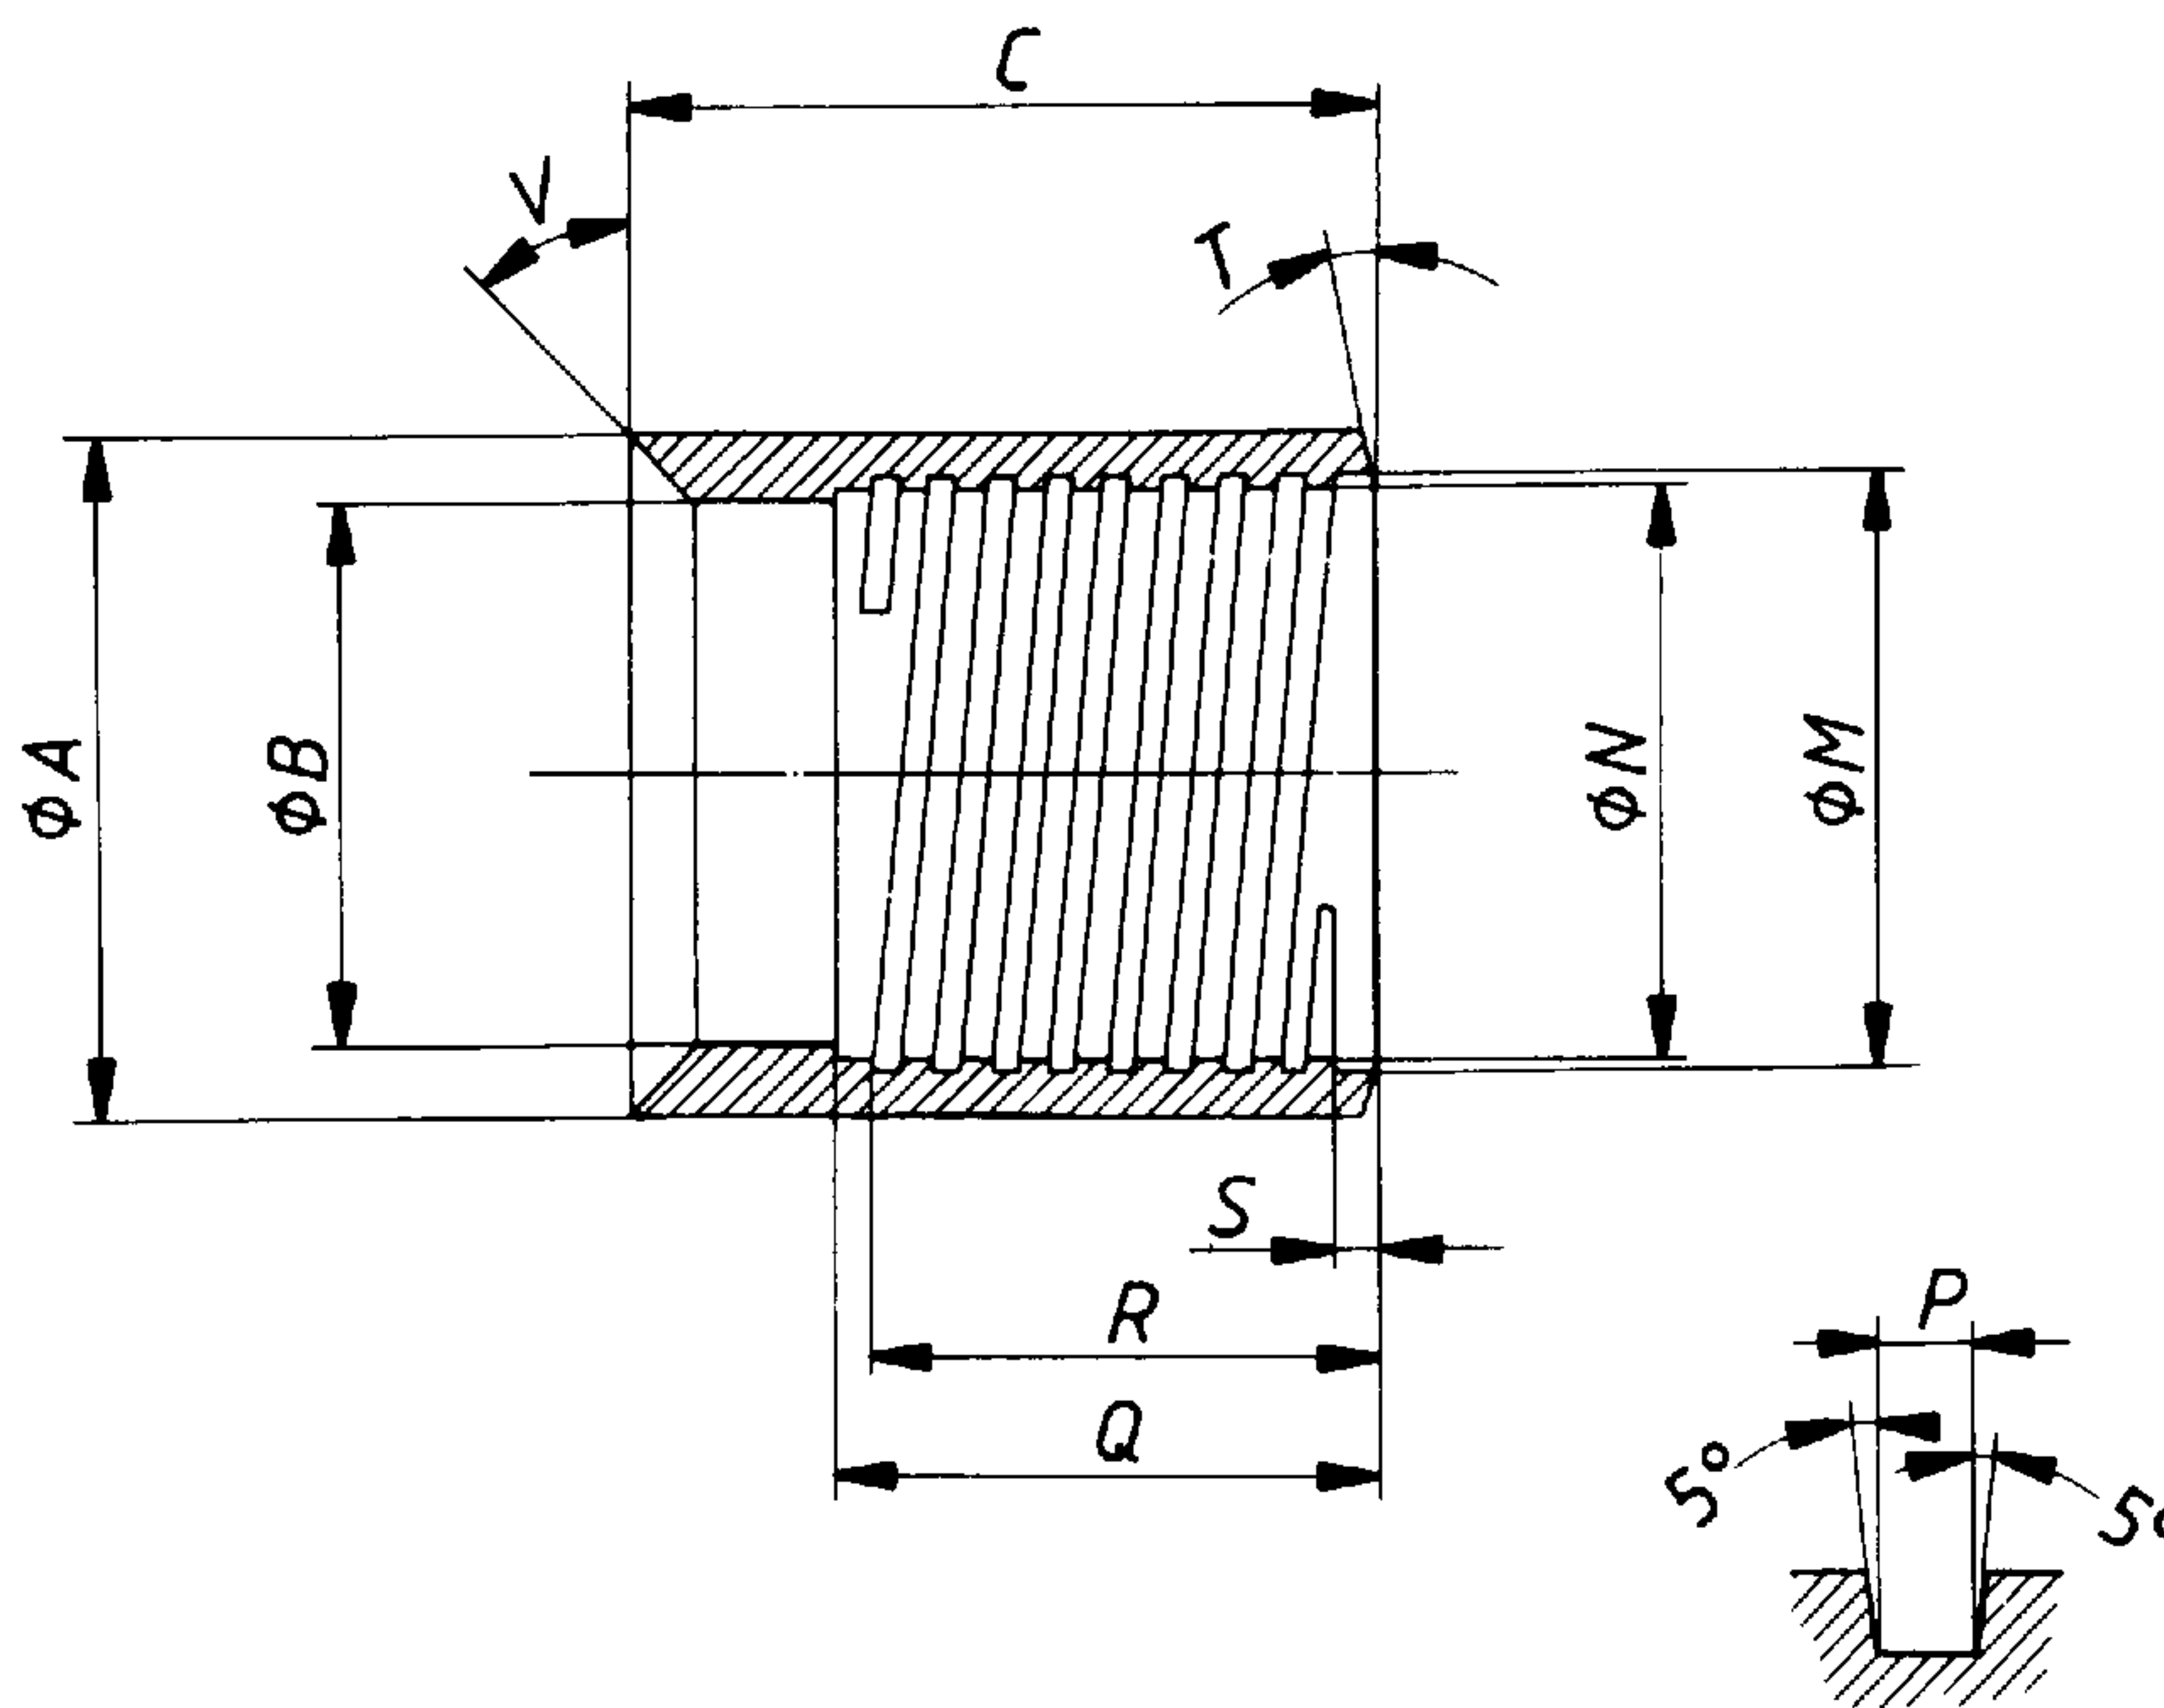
“W” design flush-jointed casing – Casing drive shoe (see table 11)
